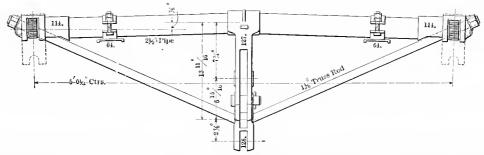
21/2-Inch National Hollow Triple Brake Beam with Adjustable Heads for 6-Wheel Passenger Trucks.
